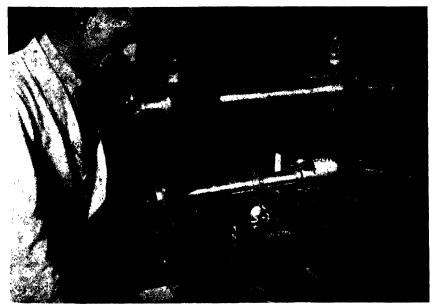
Slotting an aluminium and brass component, using a tungsten-carbide slotting cutter on a high-production milling machine (*Protolite, Ltd.*)
